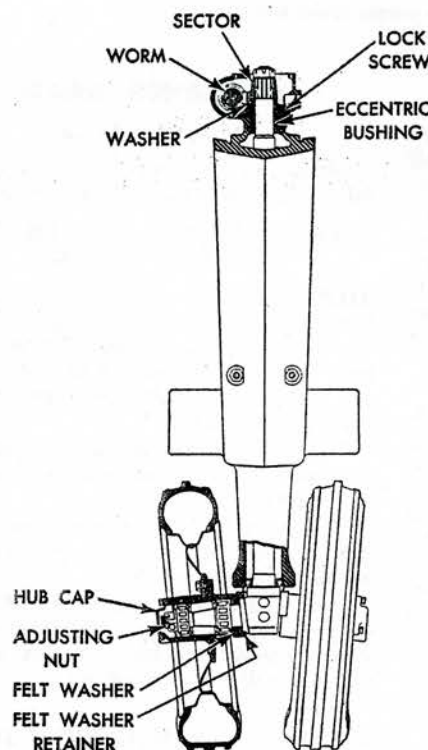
Front suspension and steering gear. Typical of Series A, B, G, H with dual front wheels
